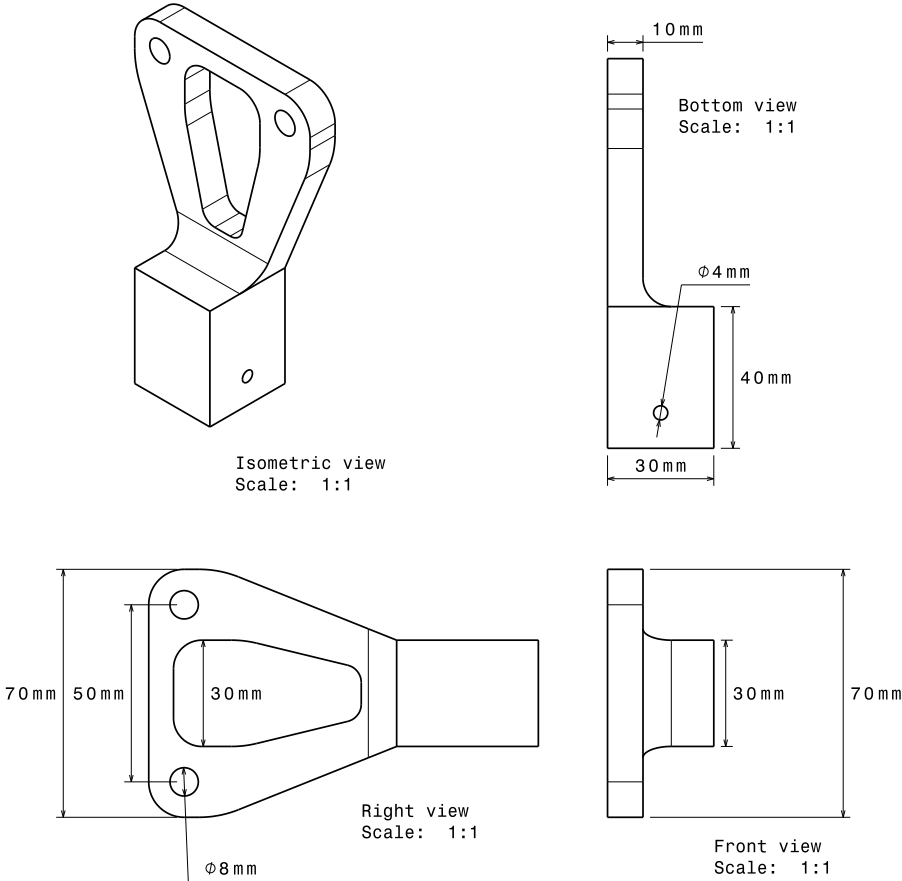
Isometric, bottom, right and front views of the supports connecting the wing to the linear actuator.
